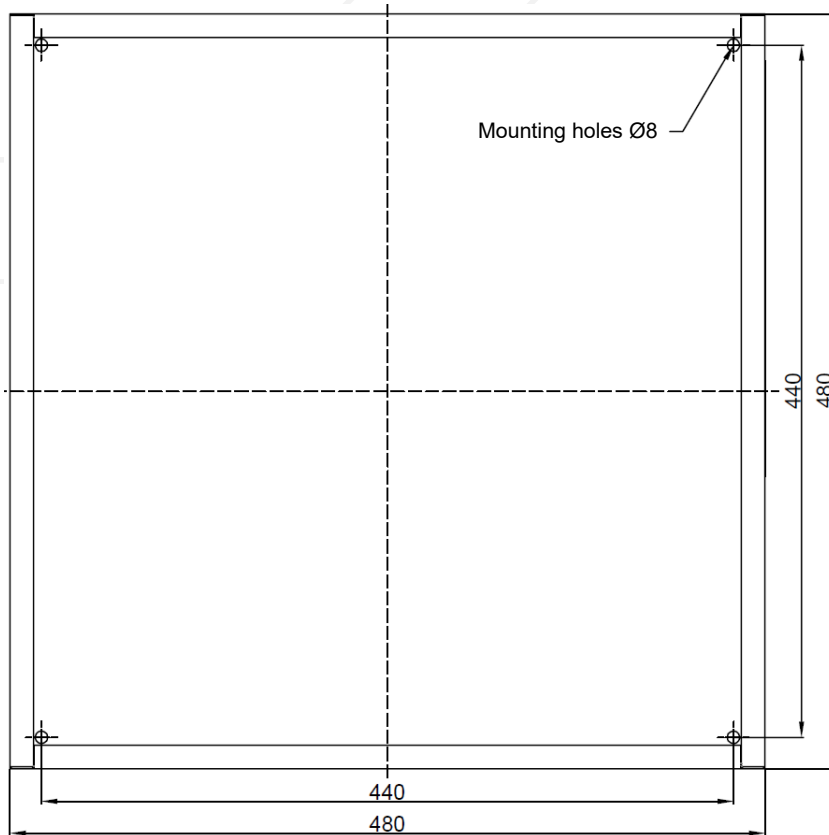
Mounting hole spacing for the 480 x 480 x 160 housing.
